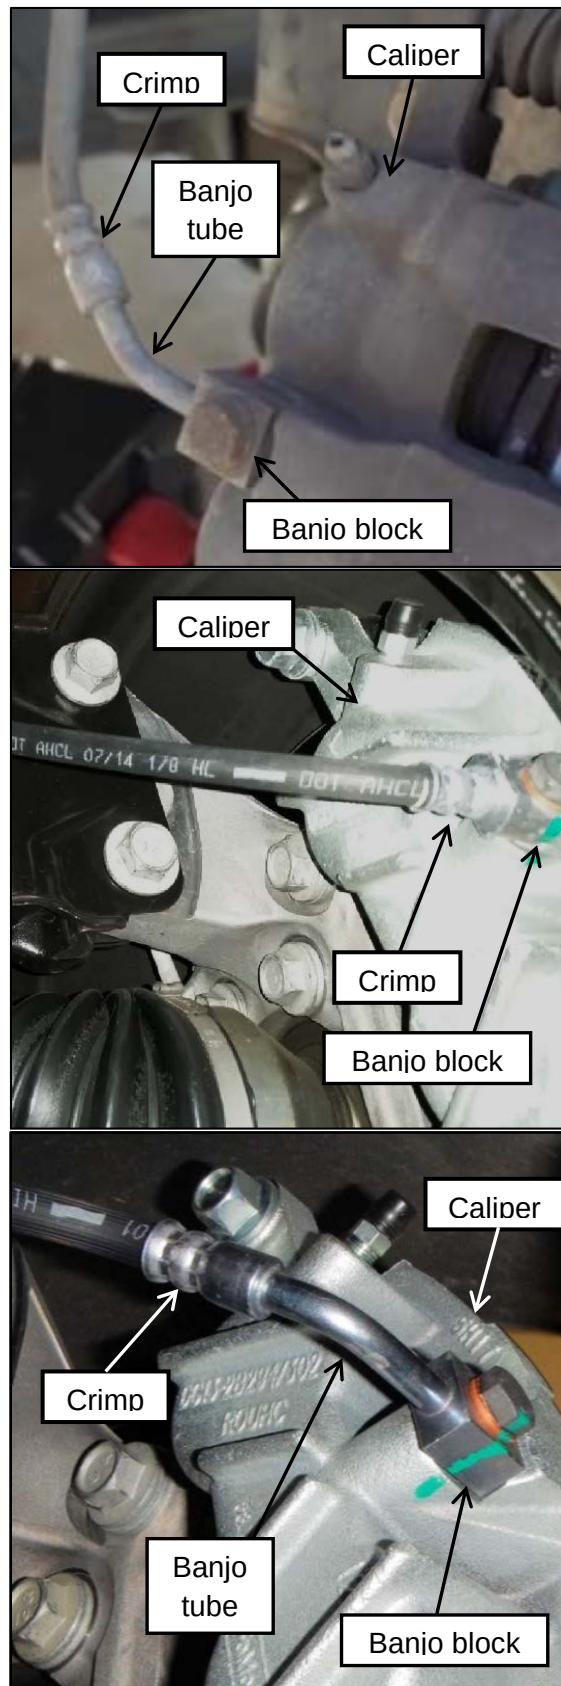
MY 2011-12 hose assembly, with banjo tube (top); Subject MY 2013-15 hose assembly, no banjo tube (middle); and MY 2016-18 hose assembly, with banjo tube (bottom).
